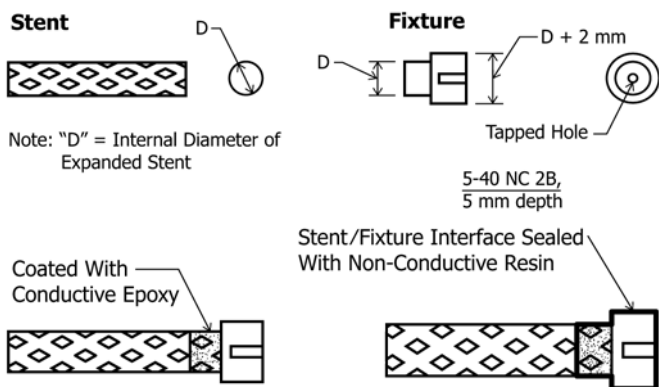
Diagram for Assembly of Stent-Holding Fixture
